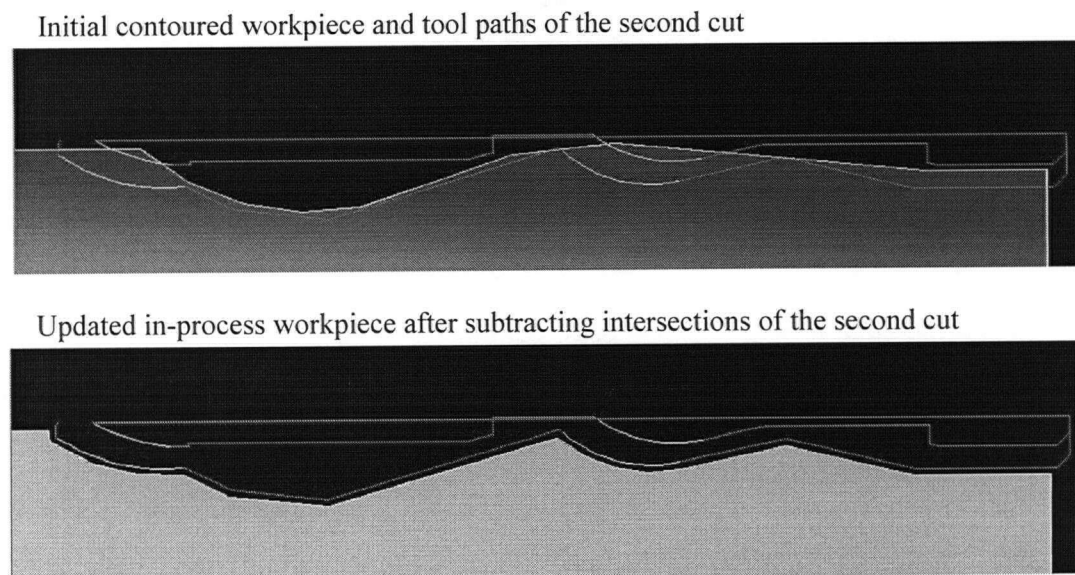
Tool Paths and Workpiece of the Second Cut
